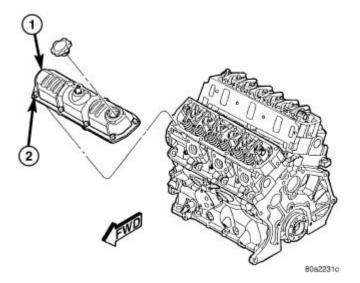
CYLINDER HEAD COVER Courtesy of CHRYSLER LLC
